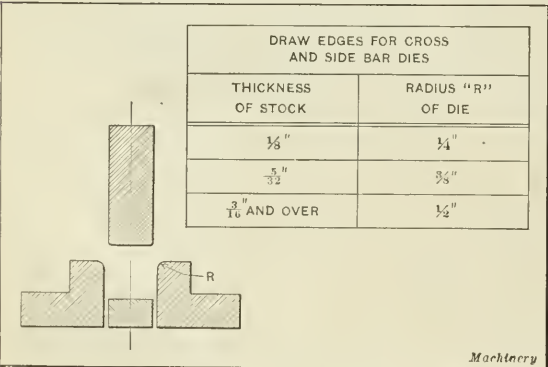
Proper Radius for Drawing Edges of Cross and Side Bars
